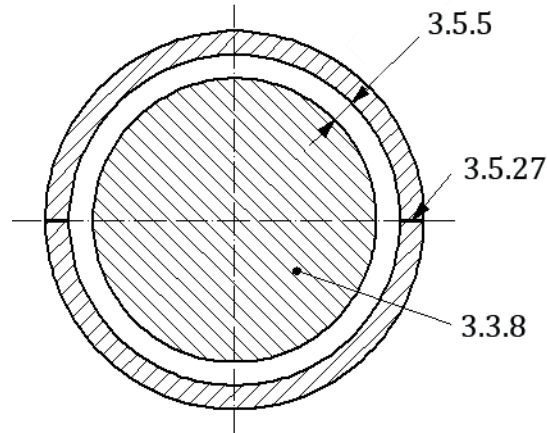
CIRCULAR CYLINDRICAL BEARING
